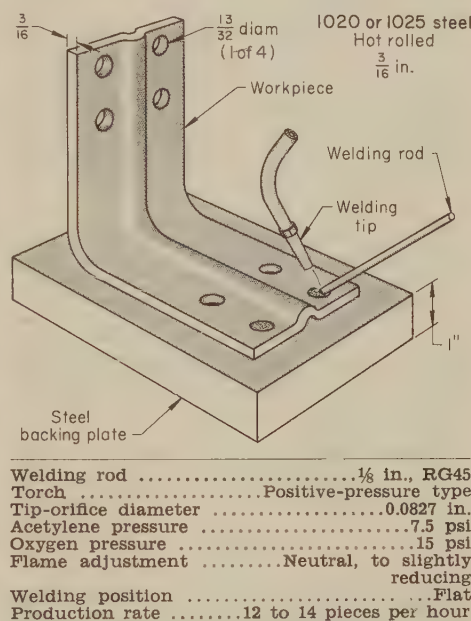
Bracket salvaged by gas welding incorrectly drilled holes (Example 519)
